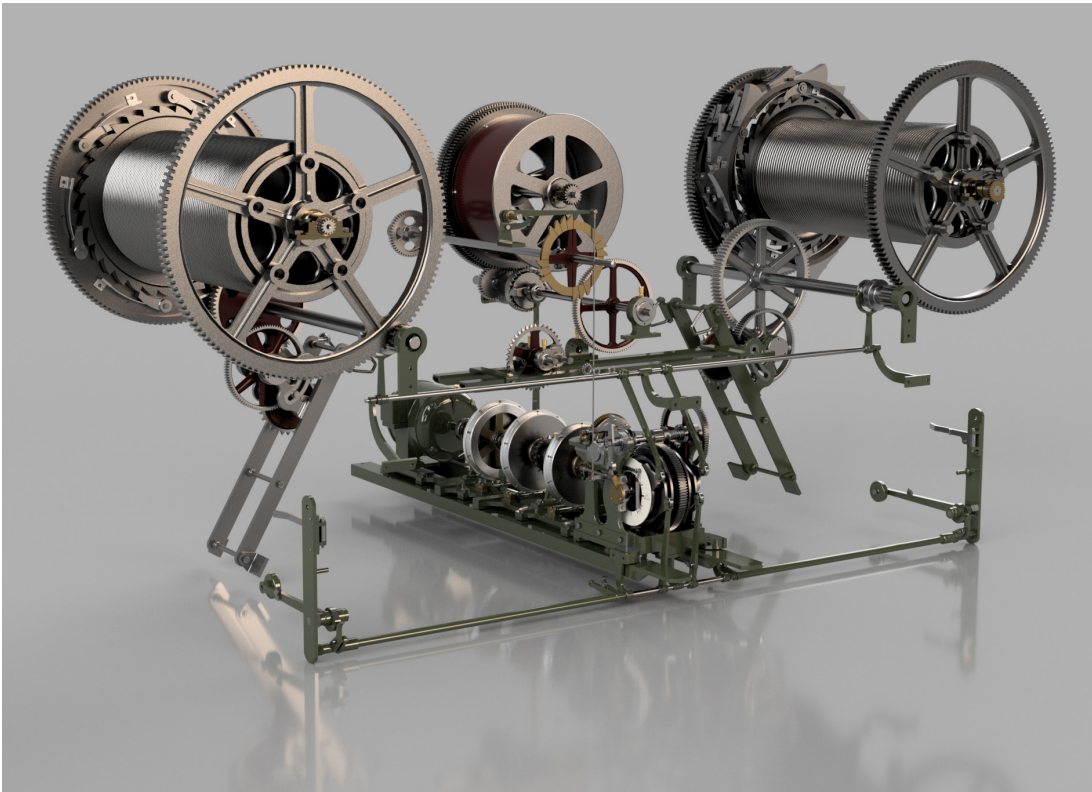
General arrangement of the winding mechanism. Image Cumbria Clock Company.
